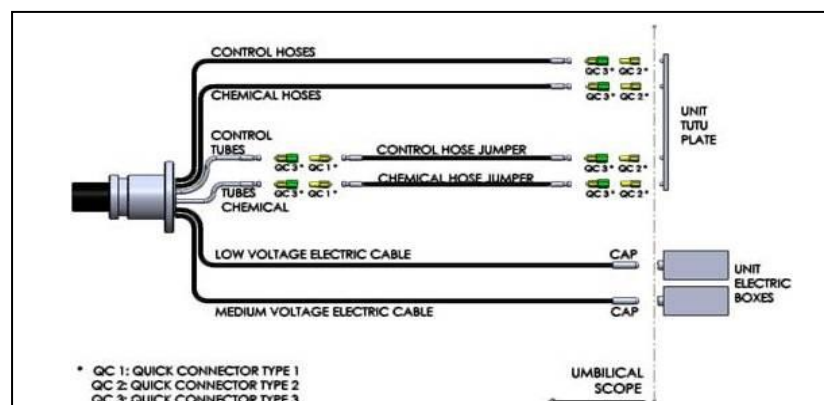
Typical arrangement for connections of Umbilical Risers on URB
